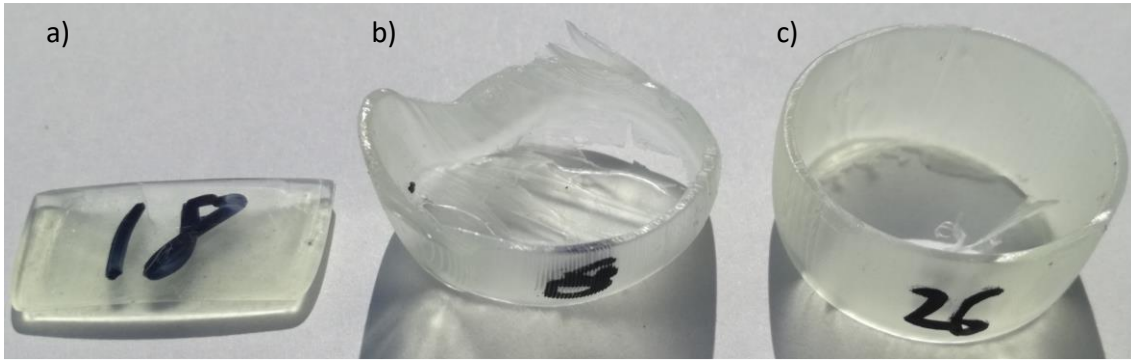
Printing failure types: geometry not formed (a), distorted geometry (b), incomplete bottom (c).
